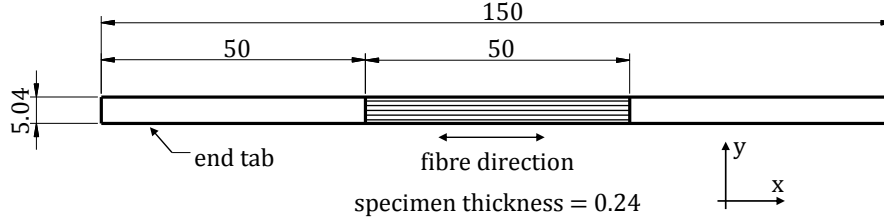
Specimen dimensions for experimental testing and analytical modelling. All dimensions are in mm.
